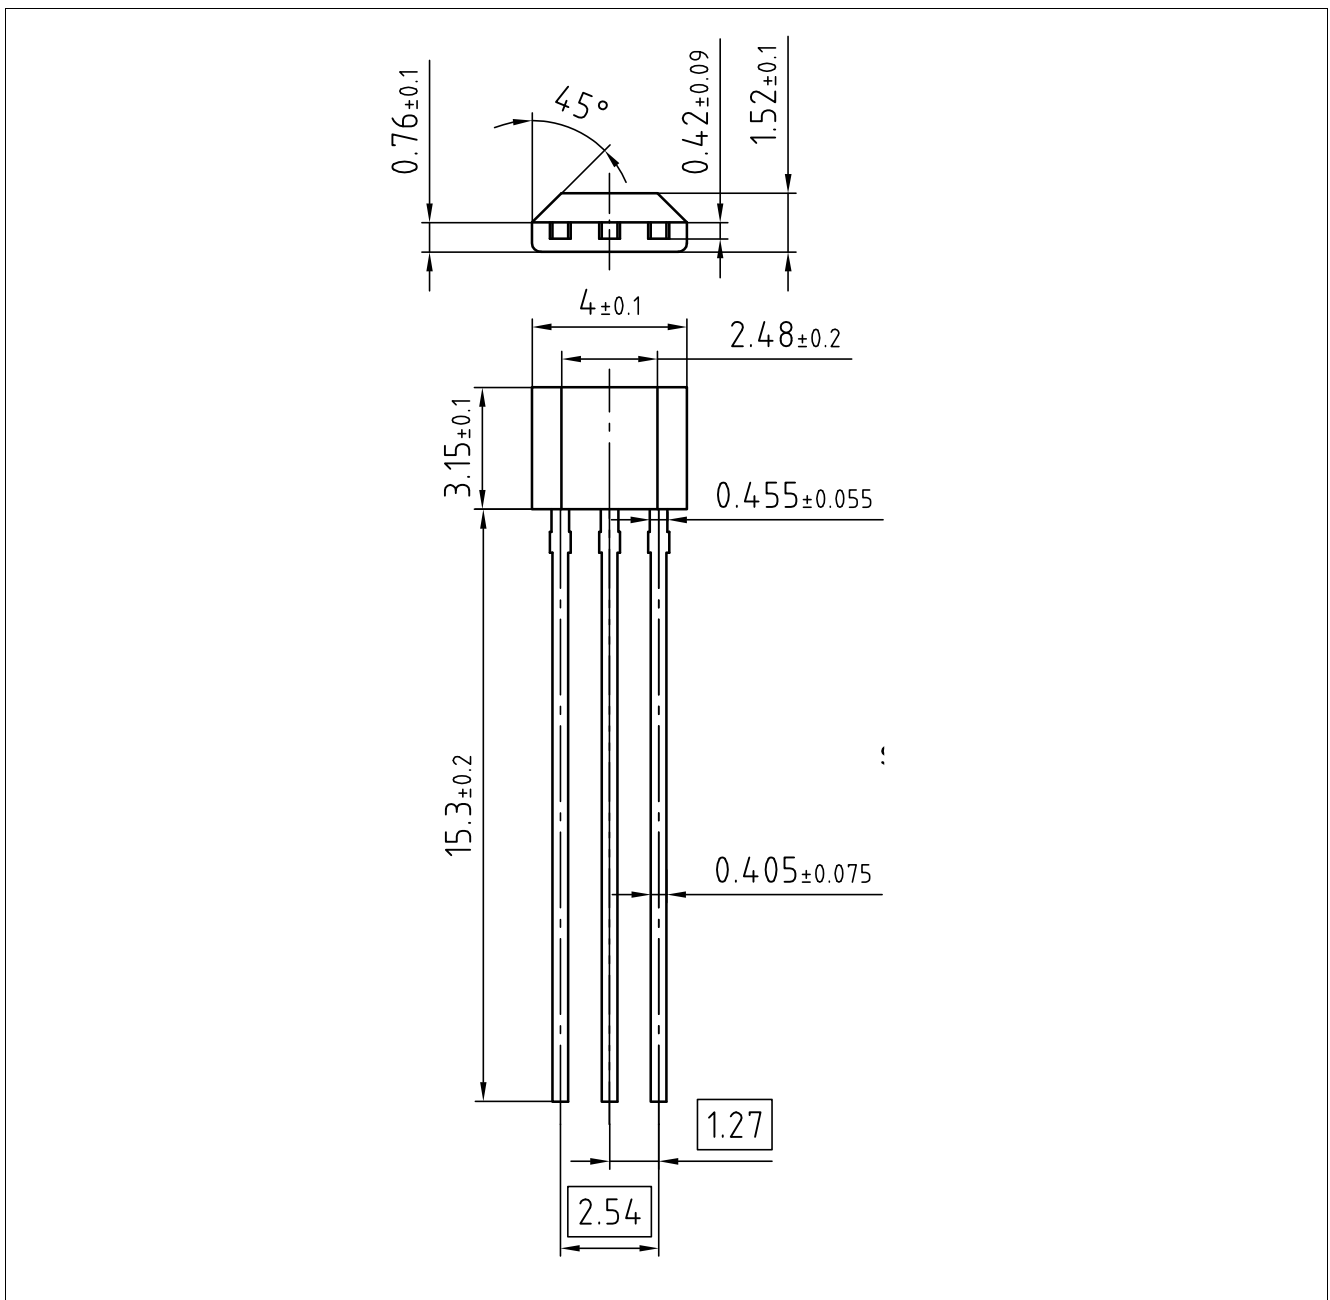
Package Outline TLV4968-1TA: TO92S-3-1 (All Dimensions in mm)
